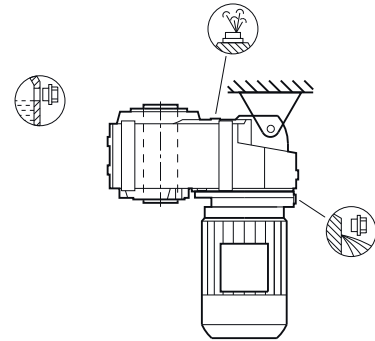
Mounting positions for parallel shaft gearbox F.AD shaft-mounted design, size 29
